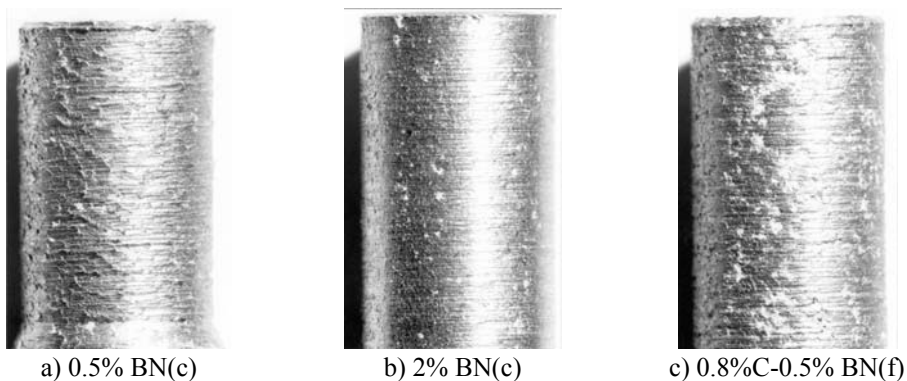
Machined surfaces of sintered iron containing BN (admixed). Finish turning, hardmetal insert P20, $v_c = 15$ m/min, 0.15 mm/rev.
